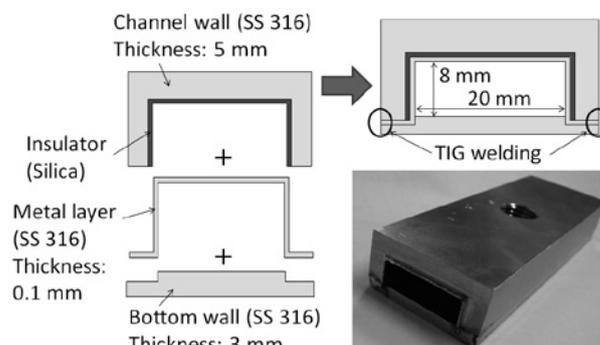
Fabrication of the three-surface and multi-layer coated channel for the experiment
